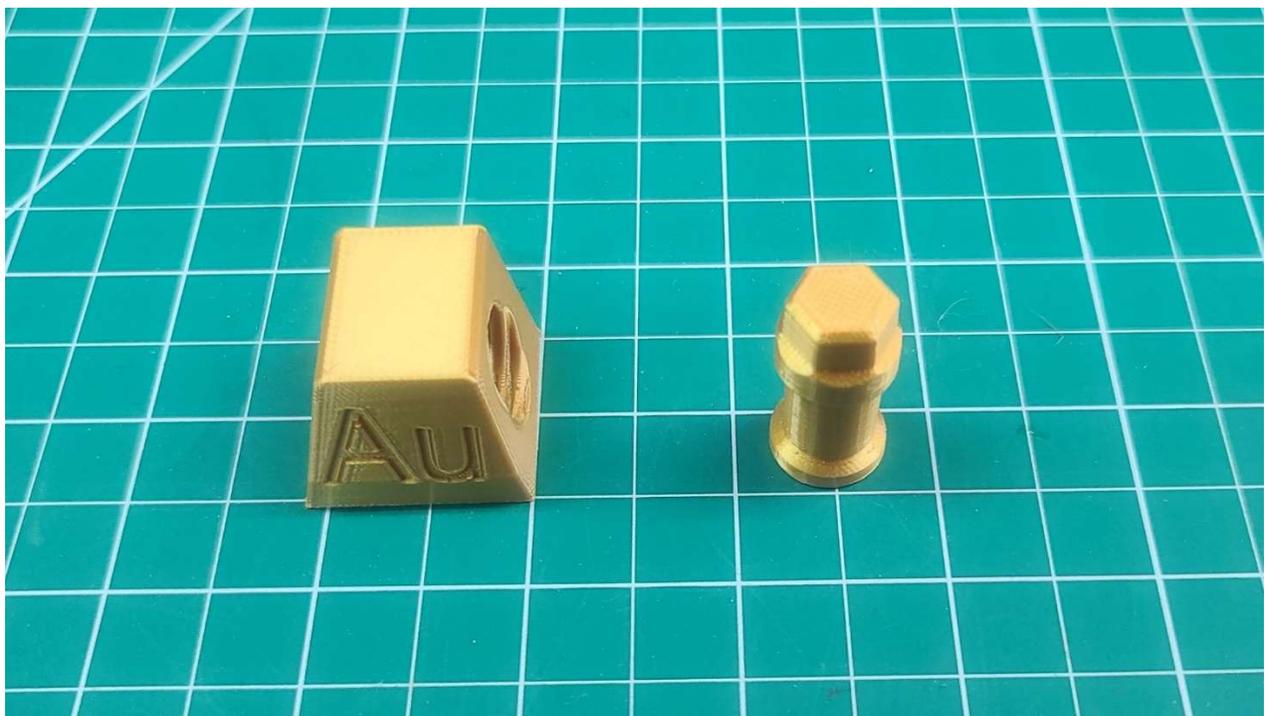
The Heist Puzzle Box Gold Silk PLA Parts
